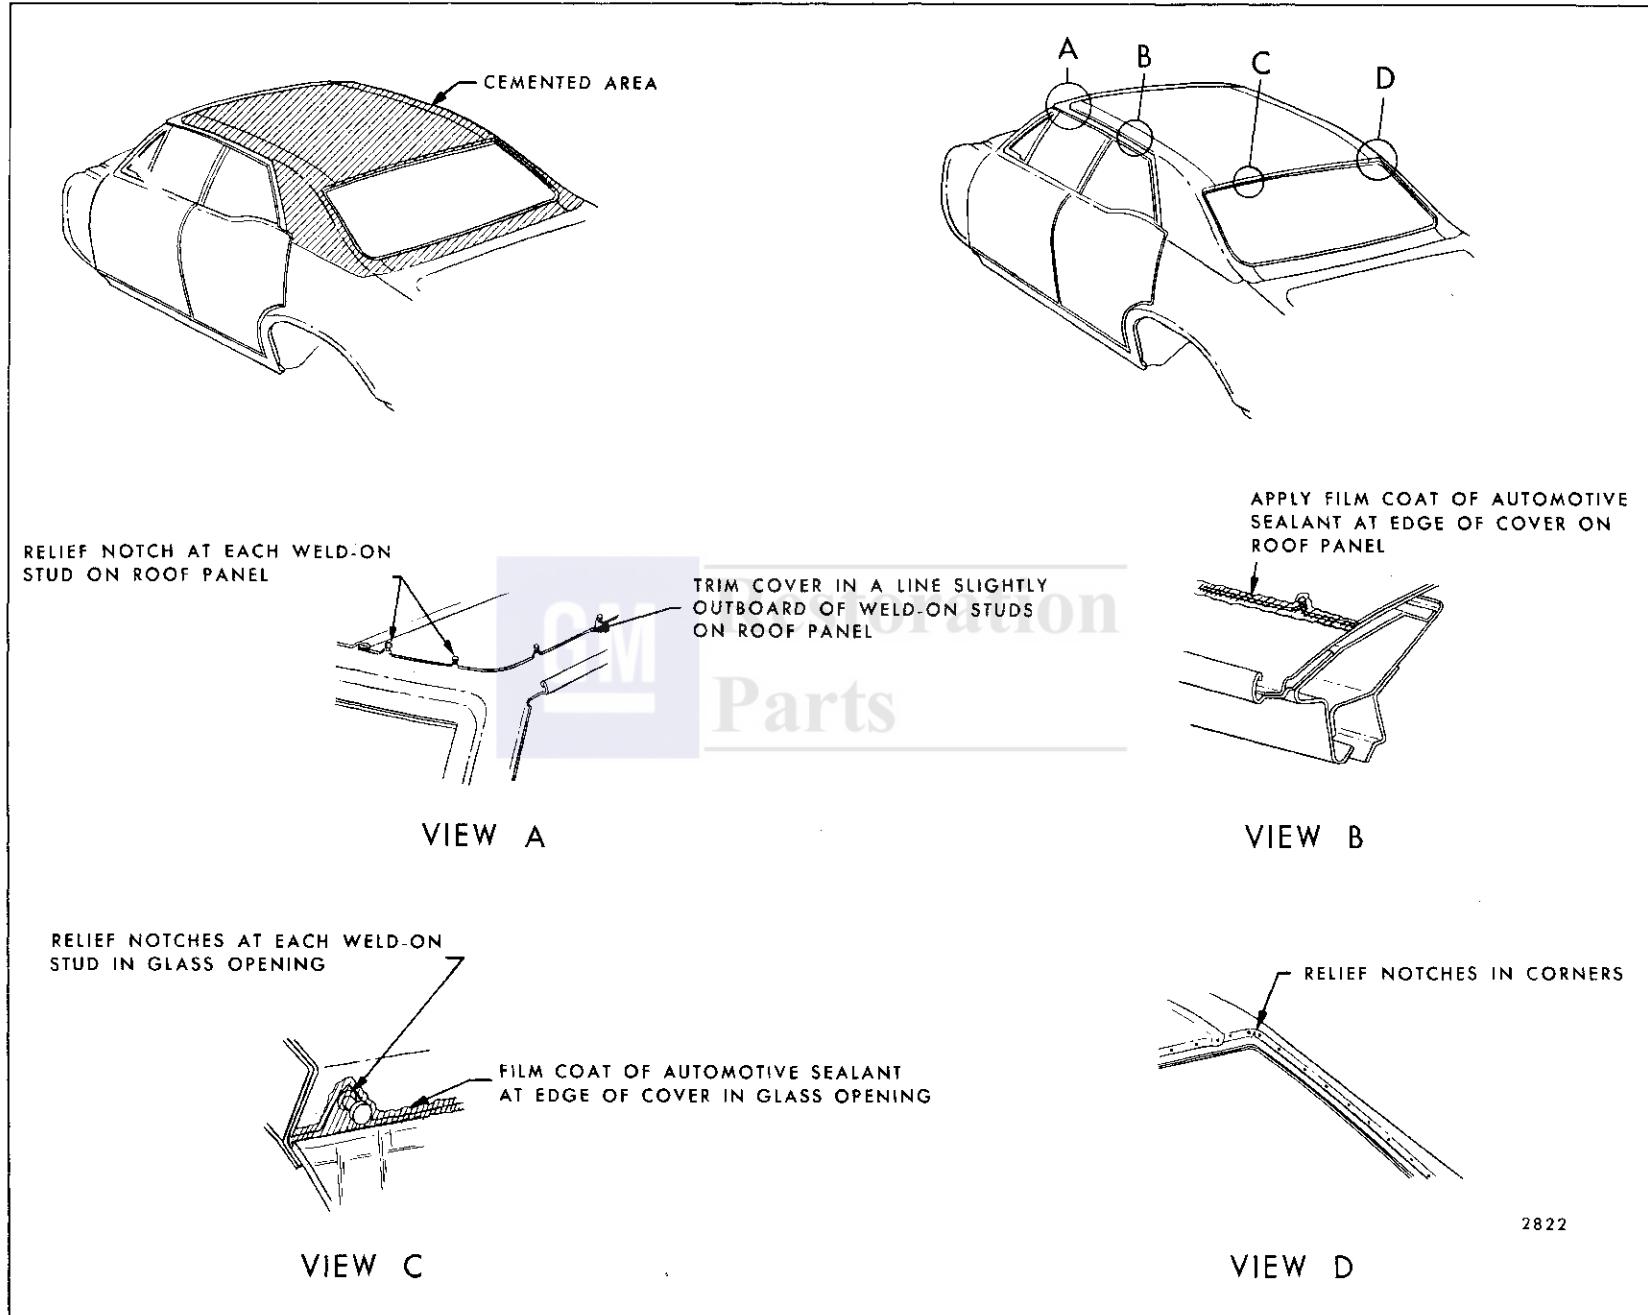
Typical Fabric Roof Cover Installation without Pad or Roof Panel Moldings
